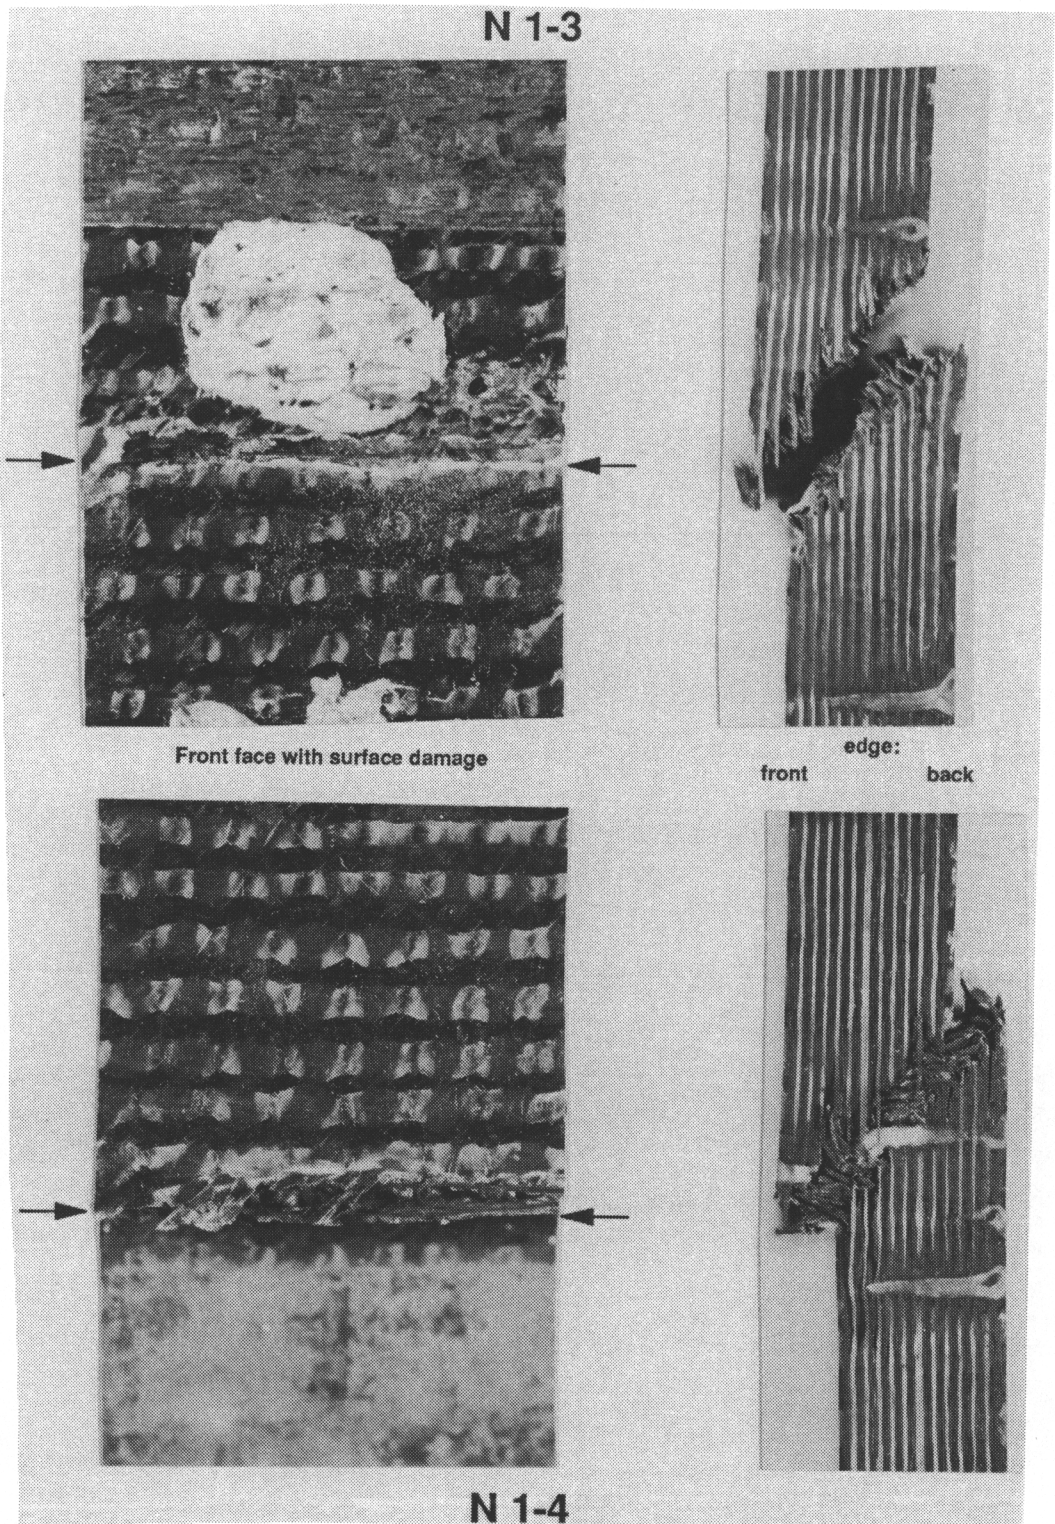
Fatigue Failure Patterns with Surface Damage Marked by Arrows (0° Specimens)
